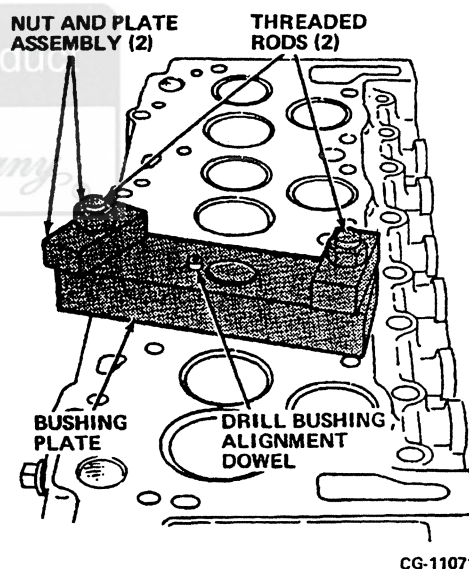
Bushing Plate Mounted Over Valve Guide
